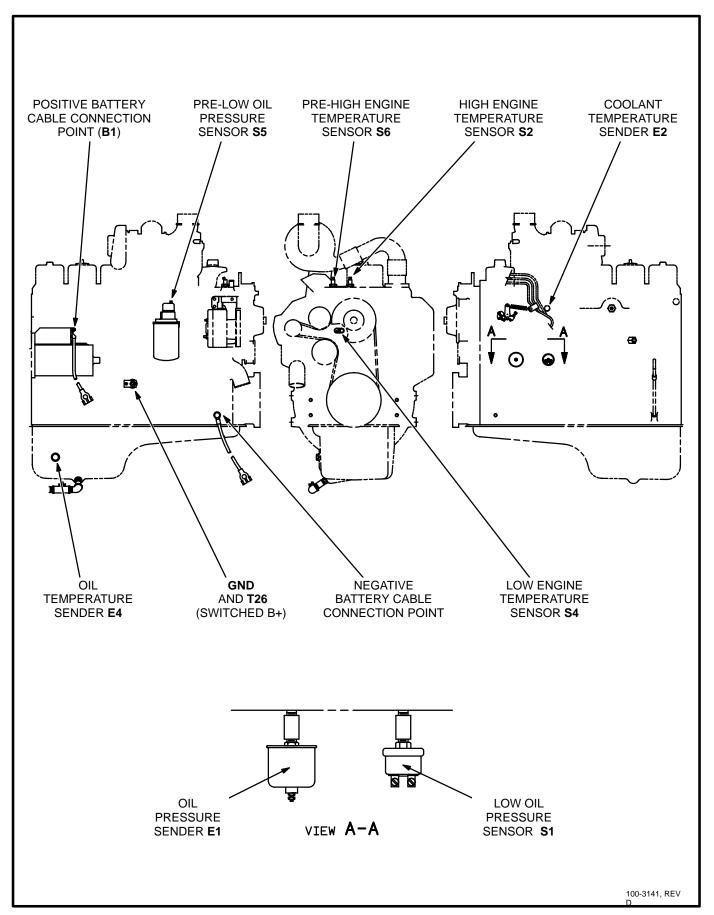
ENGINE SENSOR LOCATIONS (SIX CYLINDER B-SERIES ENGINES)—BEGINNING SPEC H
